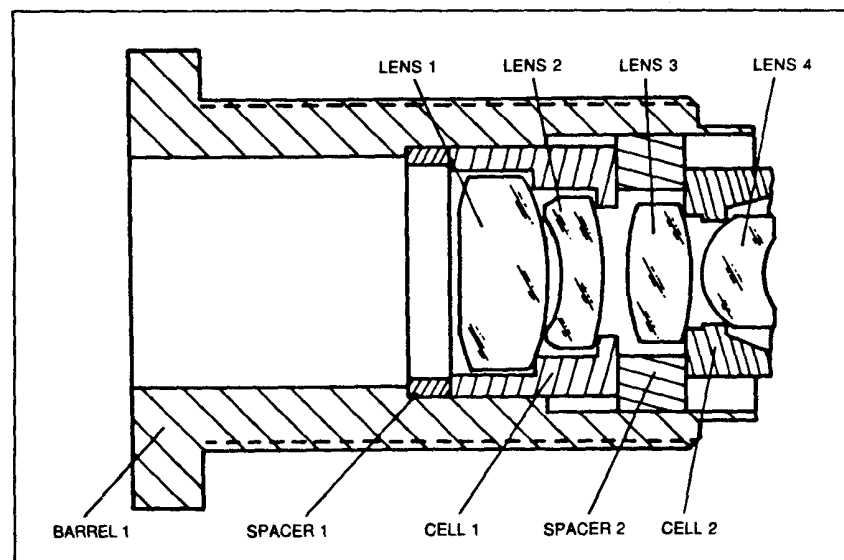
The laser diode collimator assembly includes two lens cells and a spacer inside a barrel. This design utilized conventionally fabricated optical elements.
